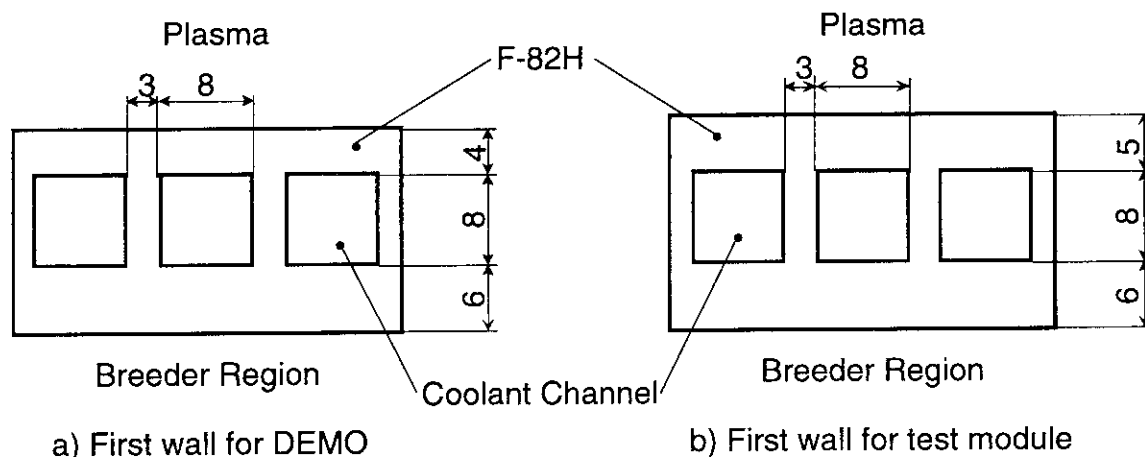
First wall dimensions for DEMO blanket and test module
